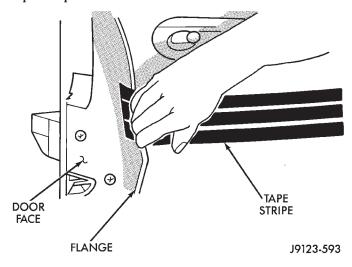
Tape Stripe/Decal Installation On Door Flange
